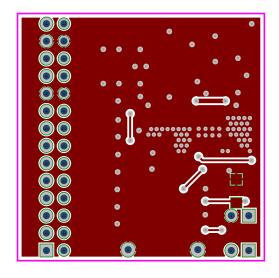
NCV7451 EVB PCB Bottom Drawing (Bottom View)
